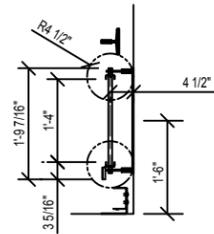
Dimensions 50HCO 04-06 (Sheet 1 of 2)
